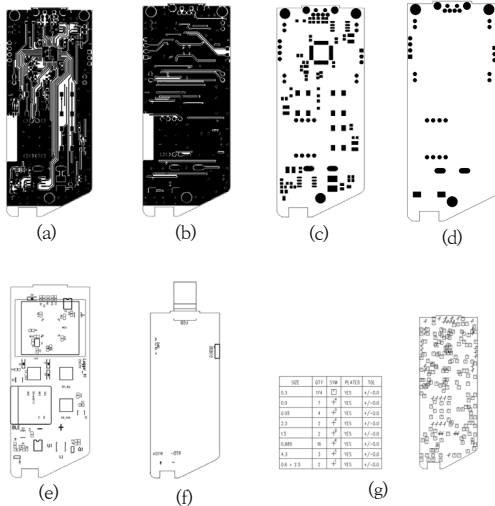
PCB Artwork Gerber Data. (A)Top Route, (B)Bottom Route, (C)Top Solder, (D)Bottom Solder, (E)Top Silk, (F)Bottom Silk, (G)Drill Drawing Data
